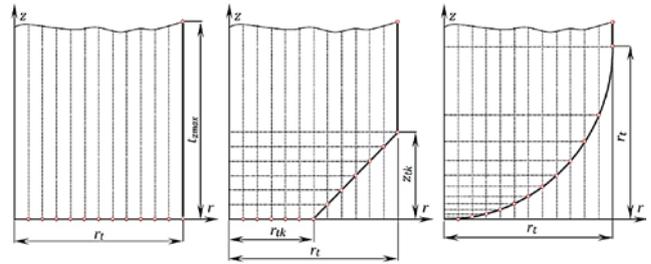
Matrices of points on tool generatrix coordinates for three types of tool: cylindrical, conical and spherical mill
